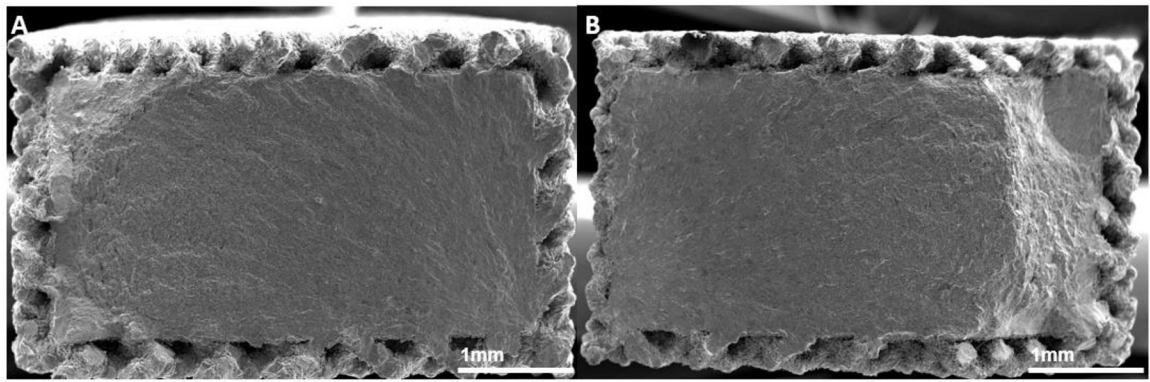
Fracture surfaces of surface porous high cycle fatigue samples, (A) no treatment, (B) SILC cleaned.
